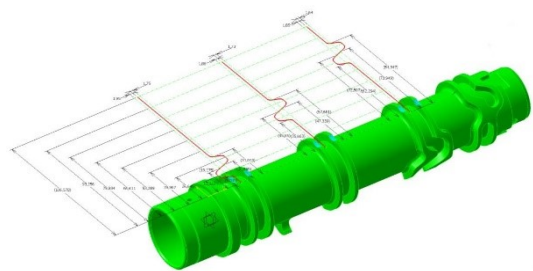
Gear selector drum with gearshift trajectories for individual gears [80]
